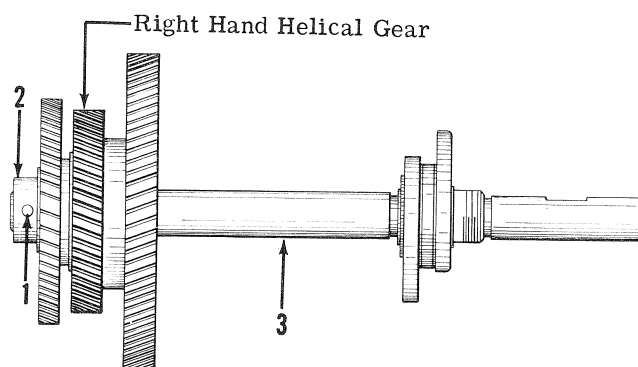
A. SHAFT ASSEMBLY - VERTICAL CAM
